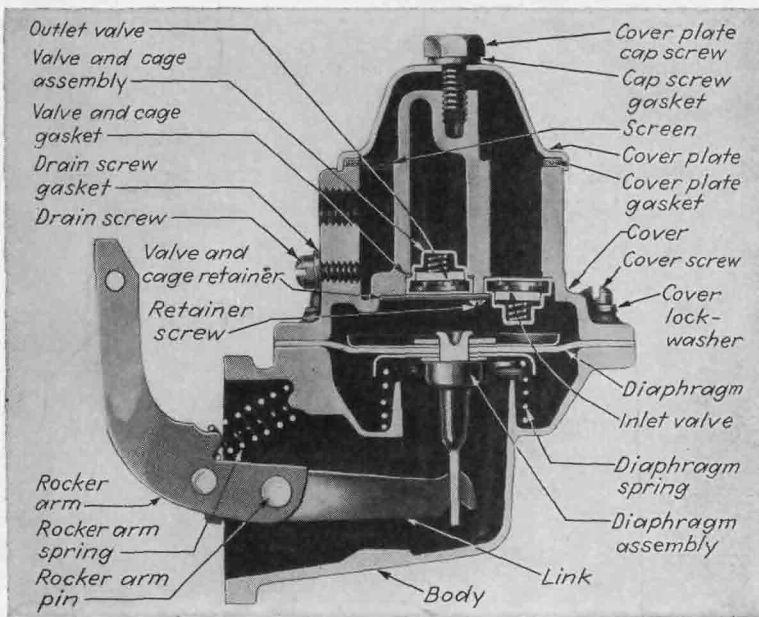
Sectional view of a fuel pump. Inlet valve is to right and outlet valve to left. (AC Spark Plug Division of General Motors Corporation)
